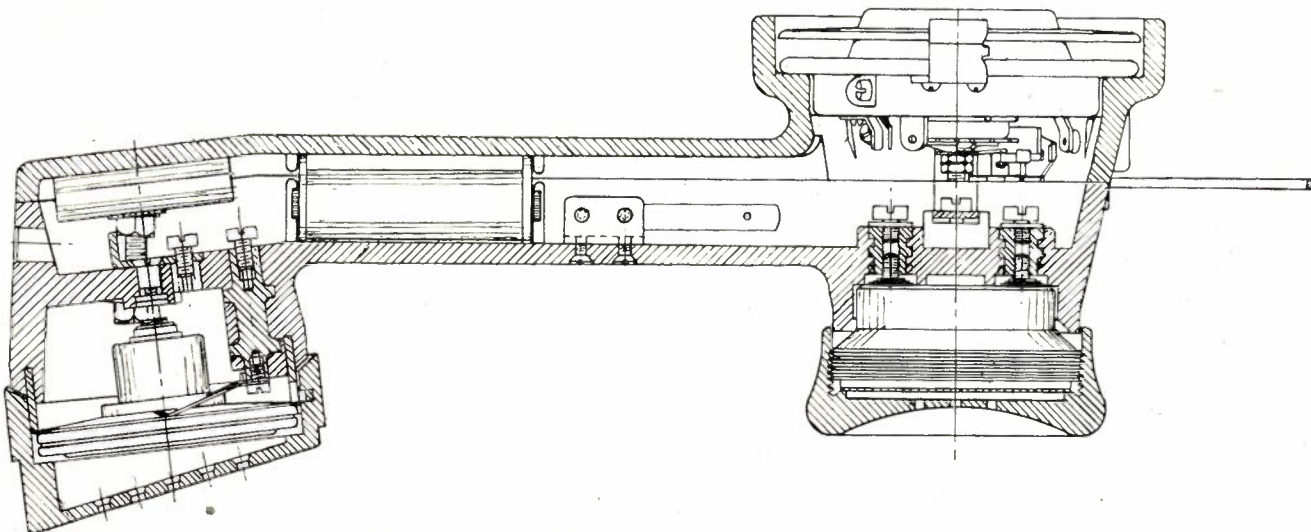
Sectional side elevation of Buttinski, wiring not shown.
